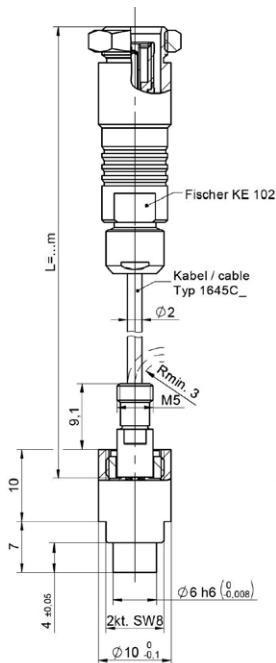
Pressure sensor Type 6172B with coaxial cable
